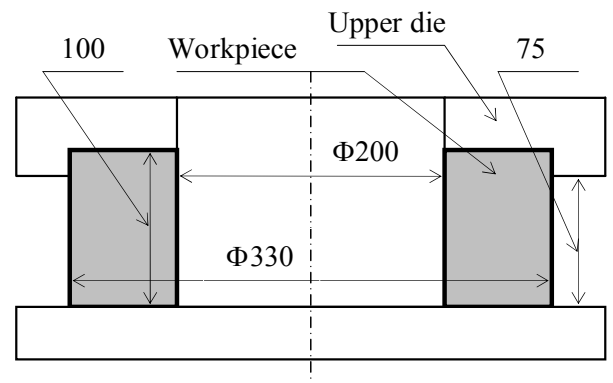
Initial shape and dimensions of the workpiece and dies.
